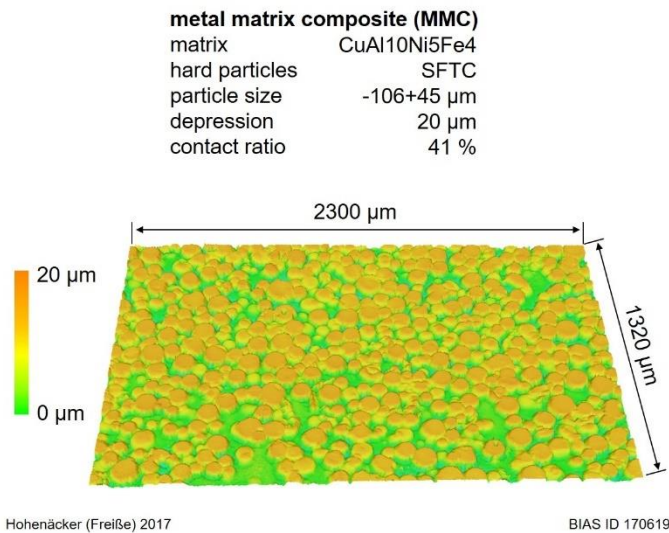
Overview picture of the laser ablated MMC tool surface with a supporting plateau out of hard particles which is in direct contact with the sheet material
